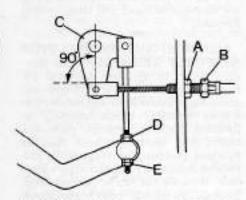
View showing pto adjustment linkage for 1490 low profile tractors.
